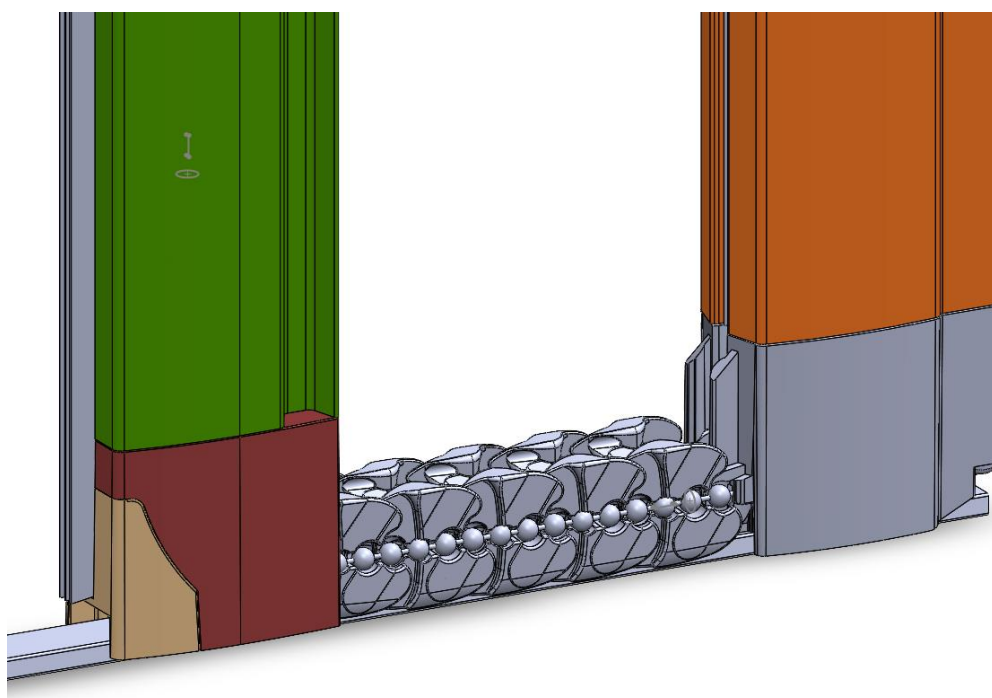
Final assembly of lower carriage mounted on the product.
